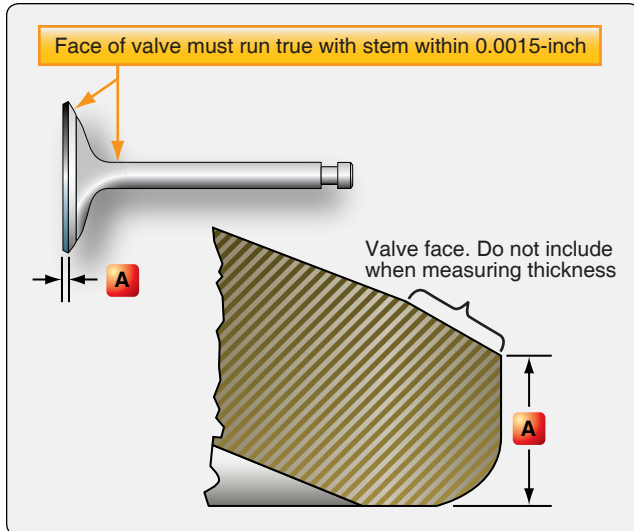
Valve showing locations for checking runout and section for measuring edge thickness.
